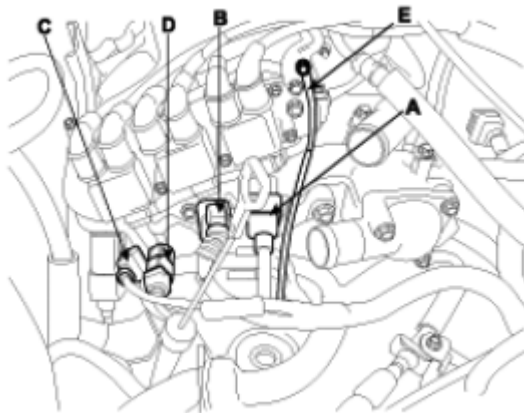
Identifying ECT (Engine Coolant Temperature) Sensor, Ignition Coil And Crankshaft Position Sensor Connector
